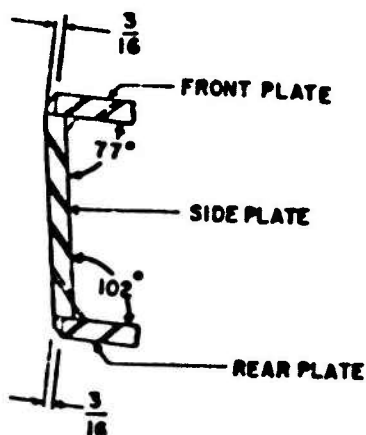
Cross Section of Applique Section Fabricated with Structural Type Weld Joint.
